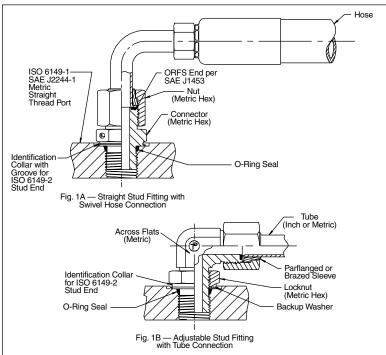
Metric Seal-Lok Fitting Conforming To ISO 8434-3 and SAE J1453.
